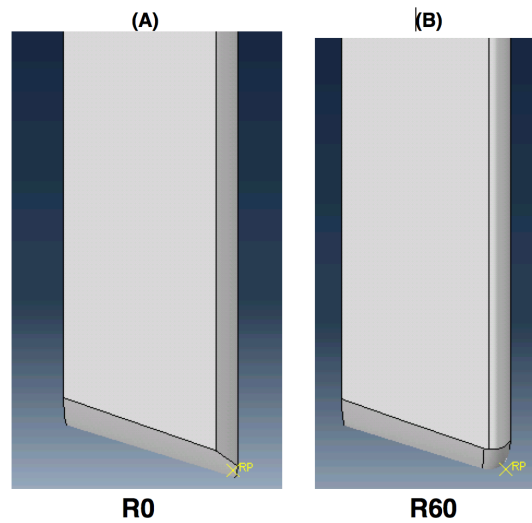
Side profile of various CBN tool tip geometries: (II) FIB-machined; (A) Sharp Tool (R0); (B) Round tool with 60nm edge radius;
